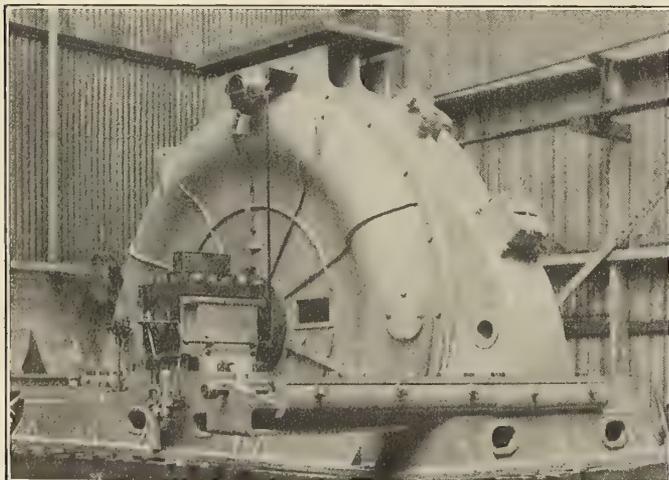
MOTOR ASSEMBLED IN THE BUILDERS' SHOP
